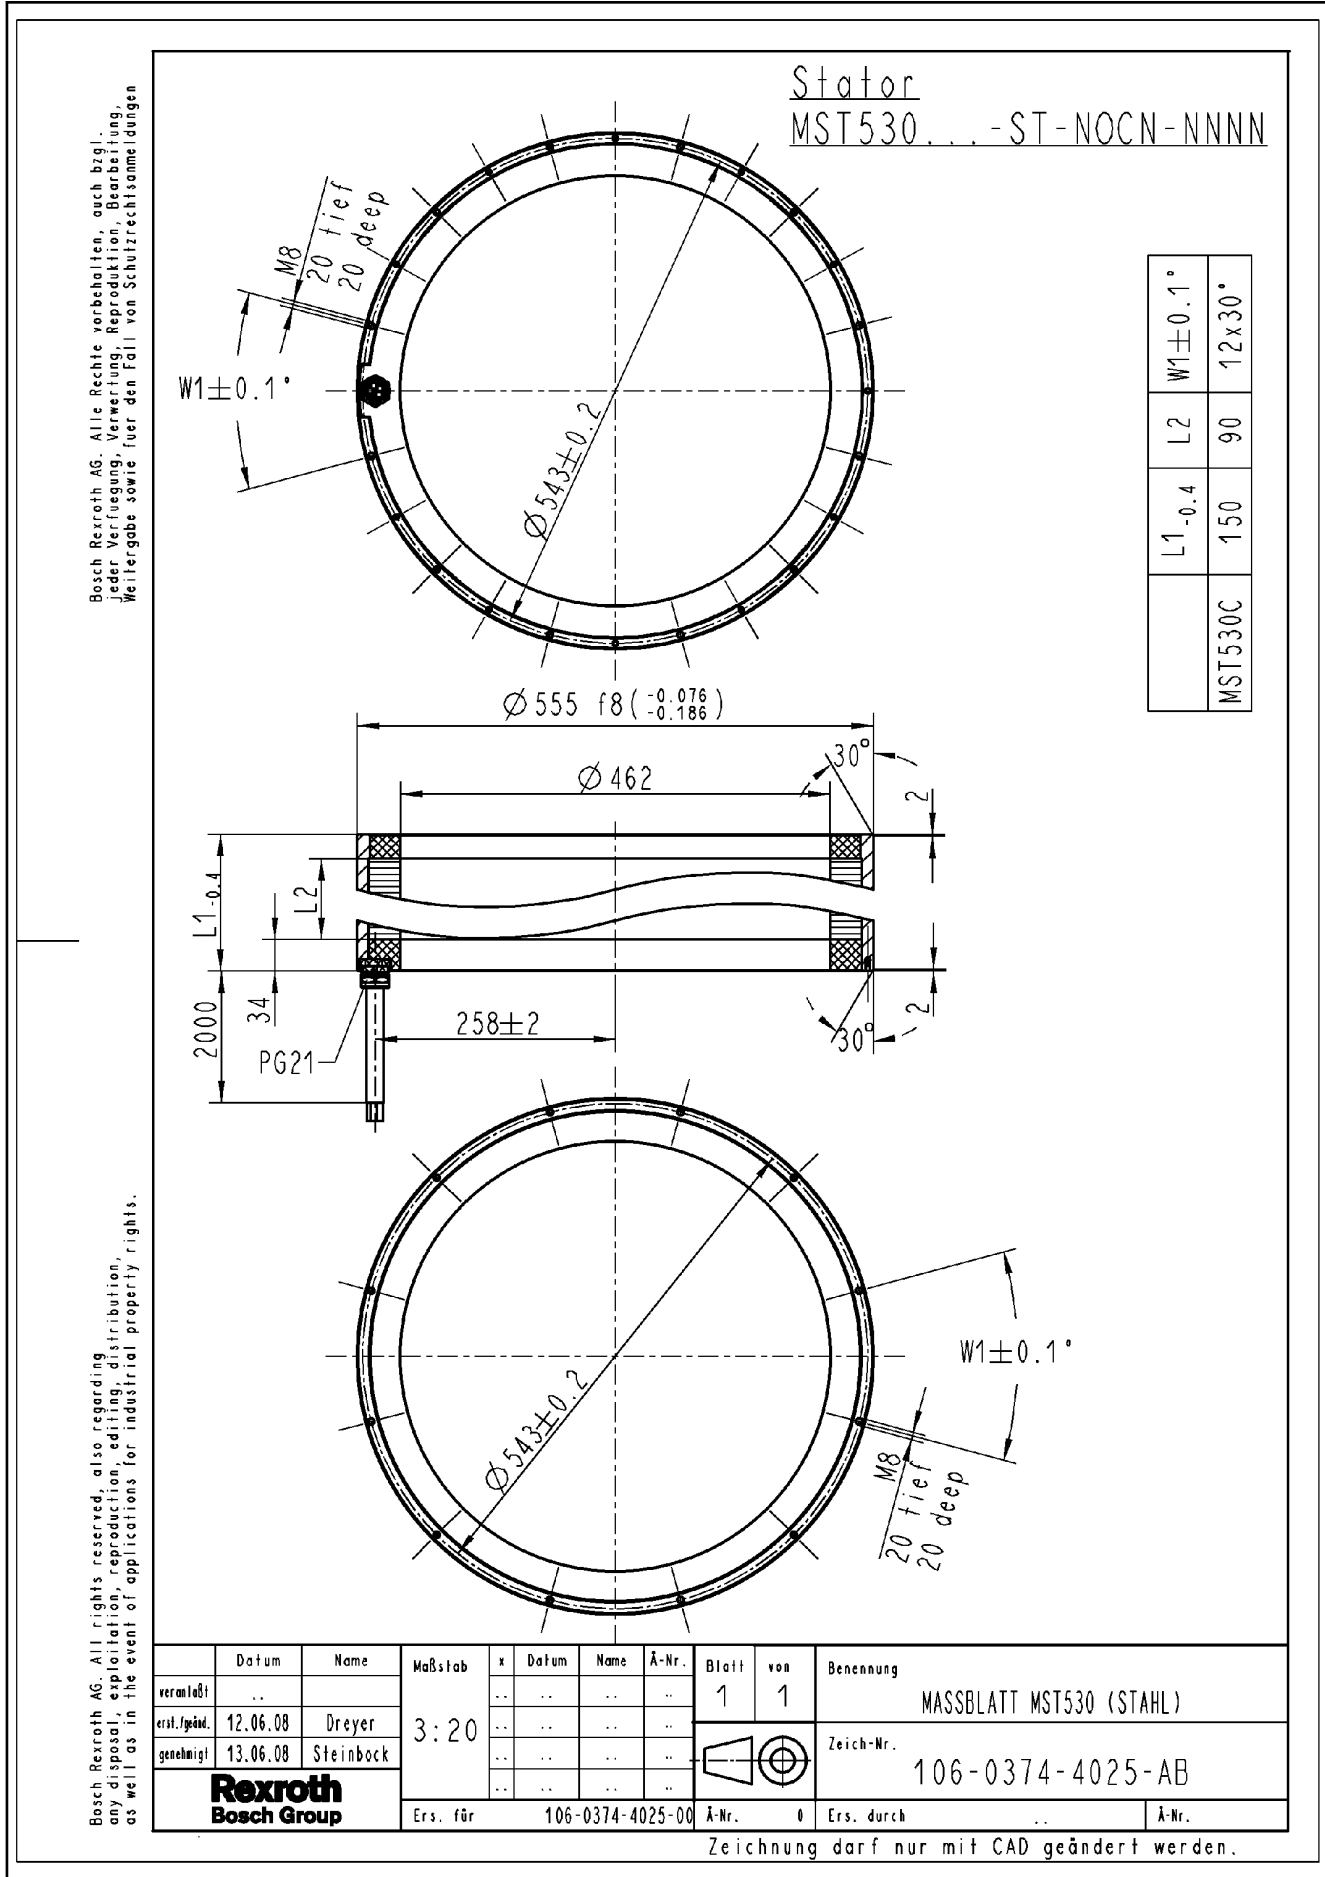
Dimension sheet for frame size 530, rotor and stator, mounted
